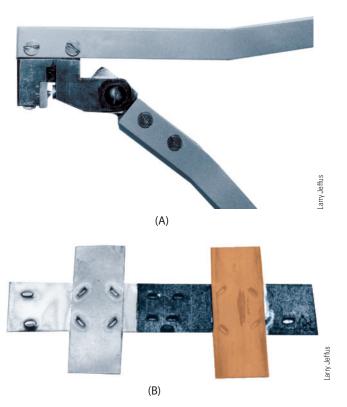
(A) Cold welding tool. (B) Cold welds made between aluminum, copper, and mild steel.
